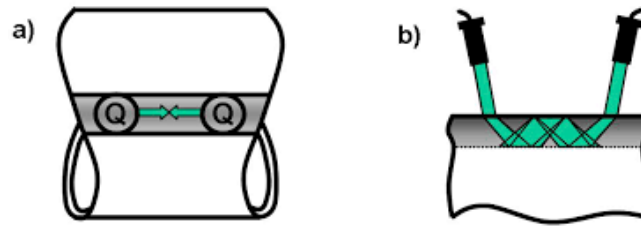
On-Bead Transverse Defect Detection. a) Top view of on-bead probe pair with respect to weld, b) cross-sectional view of probe pair and pipe.
